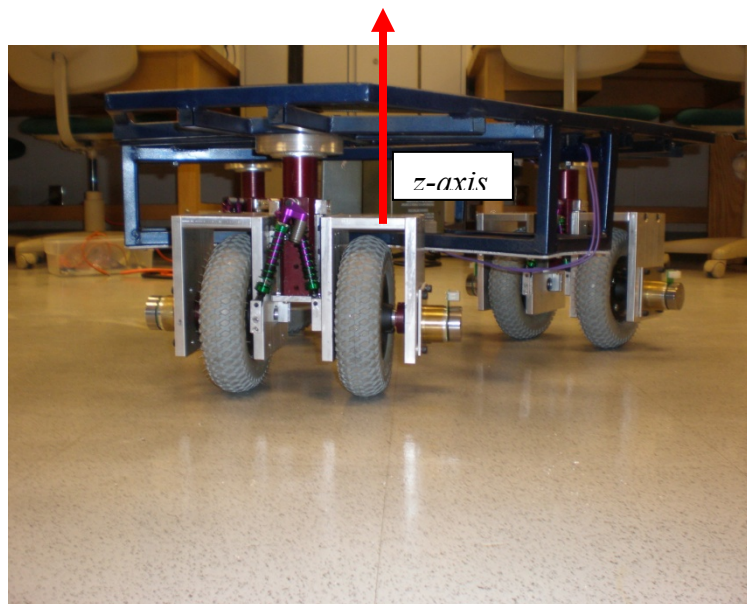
Front View of Mechanical Assembly with z-axis [1]
